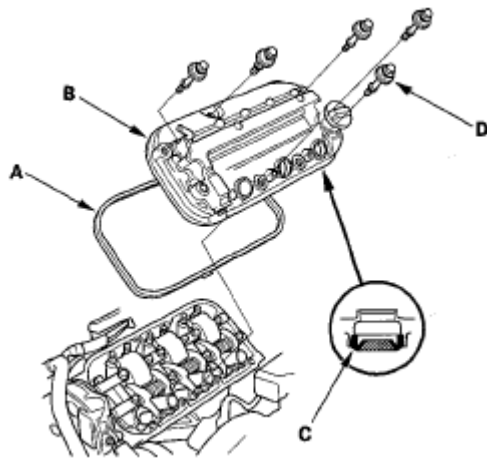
Identifying Head Cover Gasket And Bolts - Front
